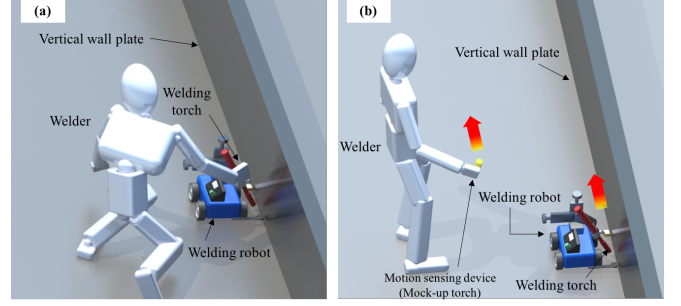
Two examples of the use of our proposed method. In this situation, a human welder and a welding carriage are performing a continuous fillet welding. The carriage moves along the welding joint by using its roller guiding mechanism, which is contacting to the vertical plate. In (a), the welder directly moves the torch attached to the robot. The movement of the torch is measured and its motion pattern are identified in real-time for automatic welding. In (b), the robot is teleoperated by the welder's hand motion by using a motion sensing device.
